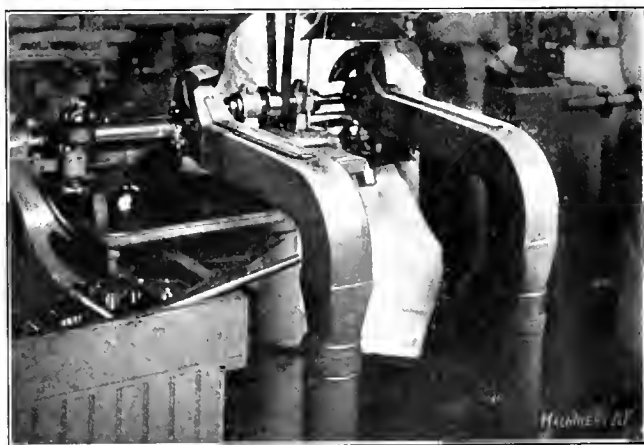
Dust Pipes and Wheel Guards on Universal Grinder
